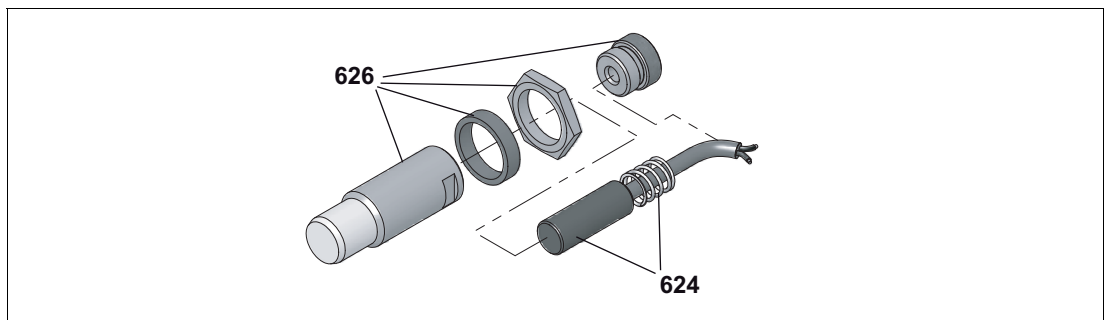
Exploded view BEG 47D/BEG 47E/BEG 47G
